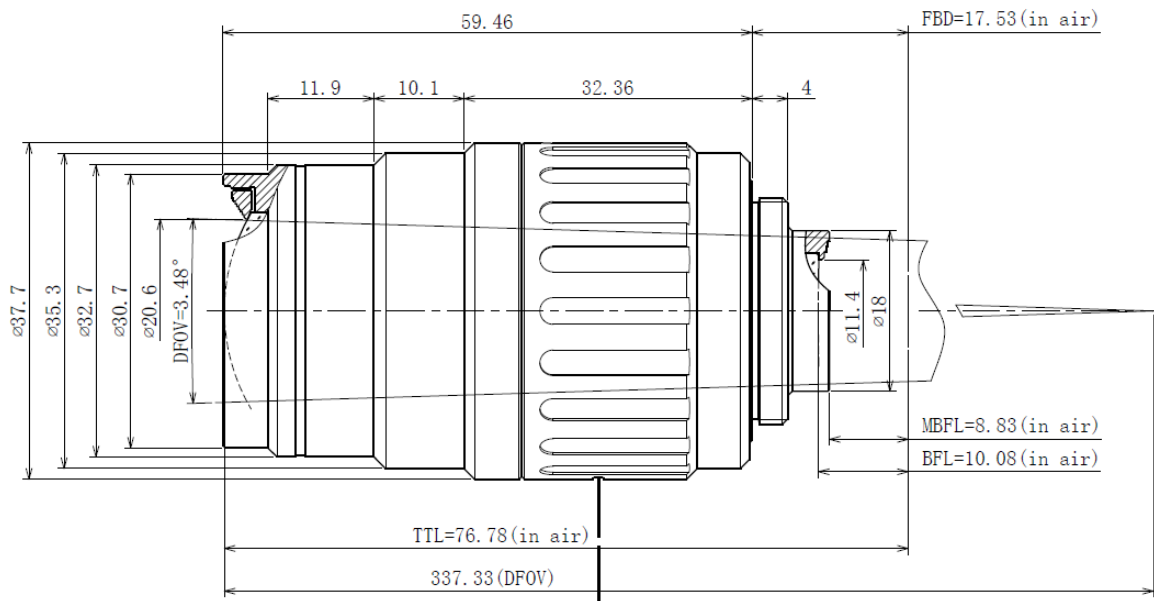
Mechanical drawing of the ELM-75-4.0-8-C-NIR
